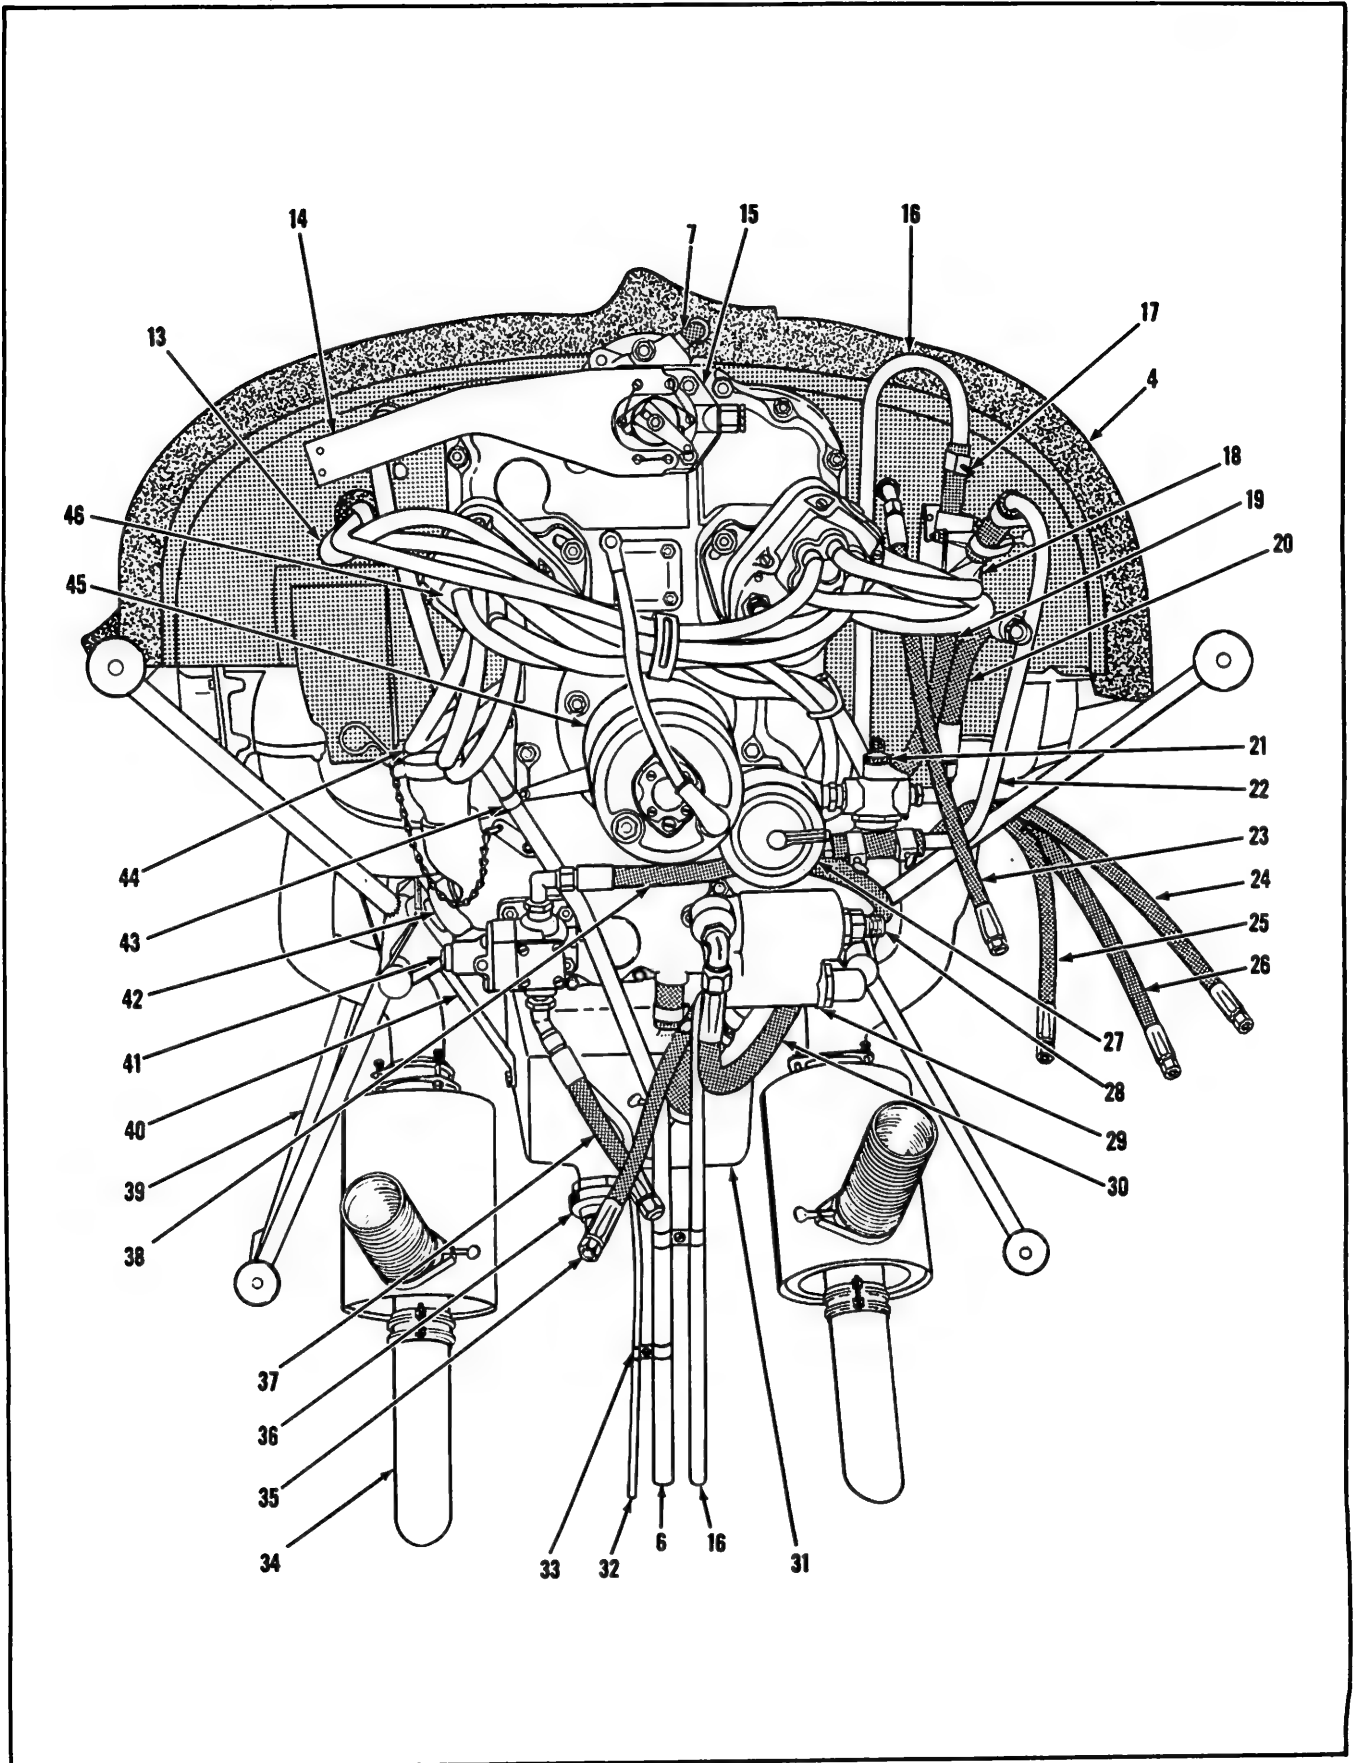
Engine Build-Up (Sheet 2 of 2)
